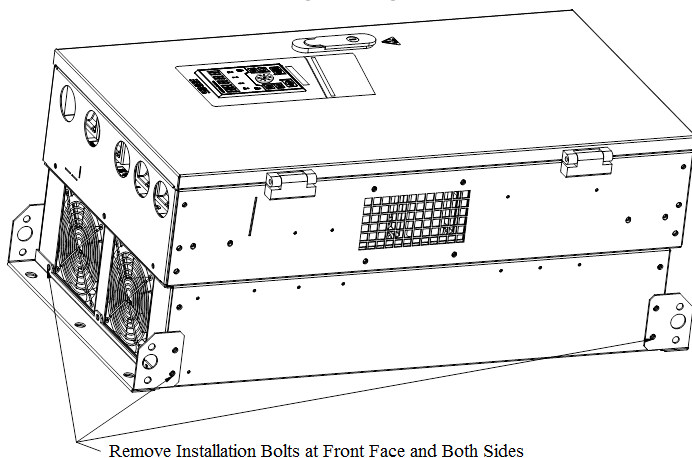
Disassemble Top and Bottom Mounting Holes
